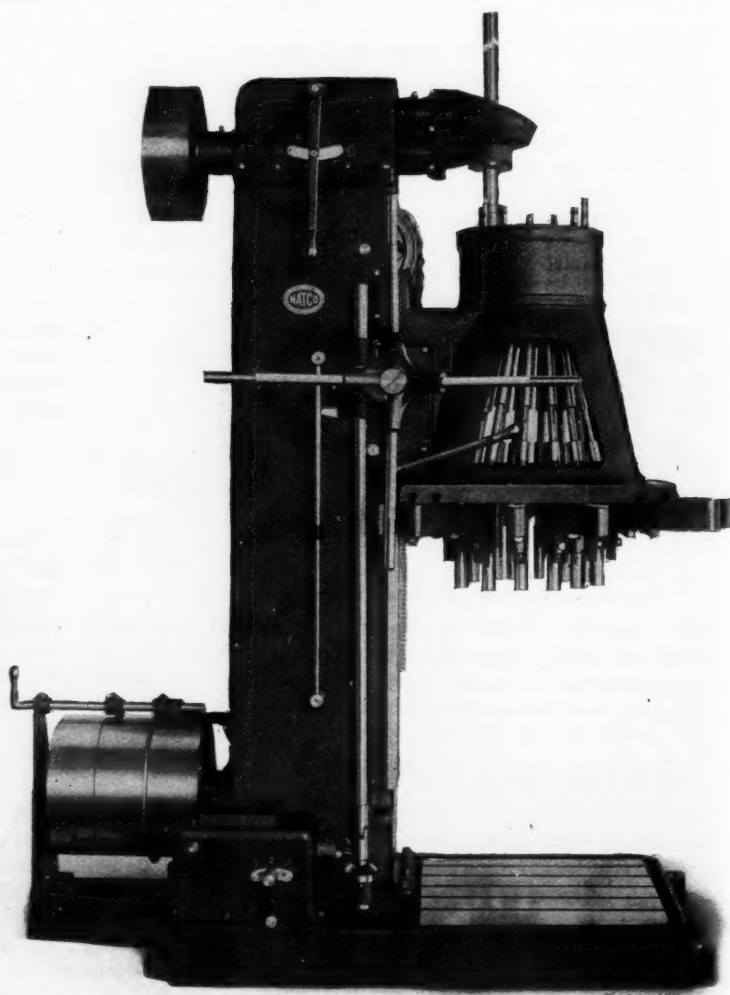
The Natco No. 26 Multiple Spindle Drilling Machine
